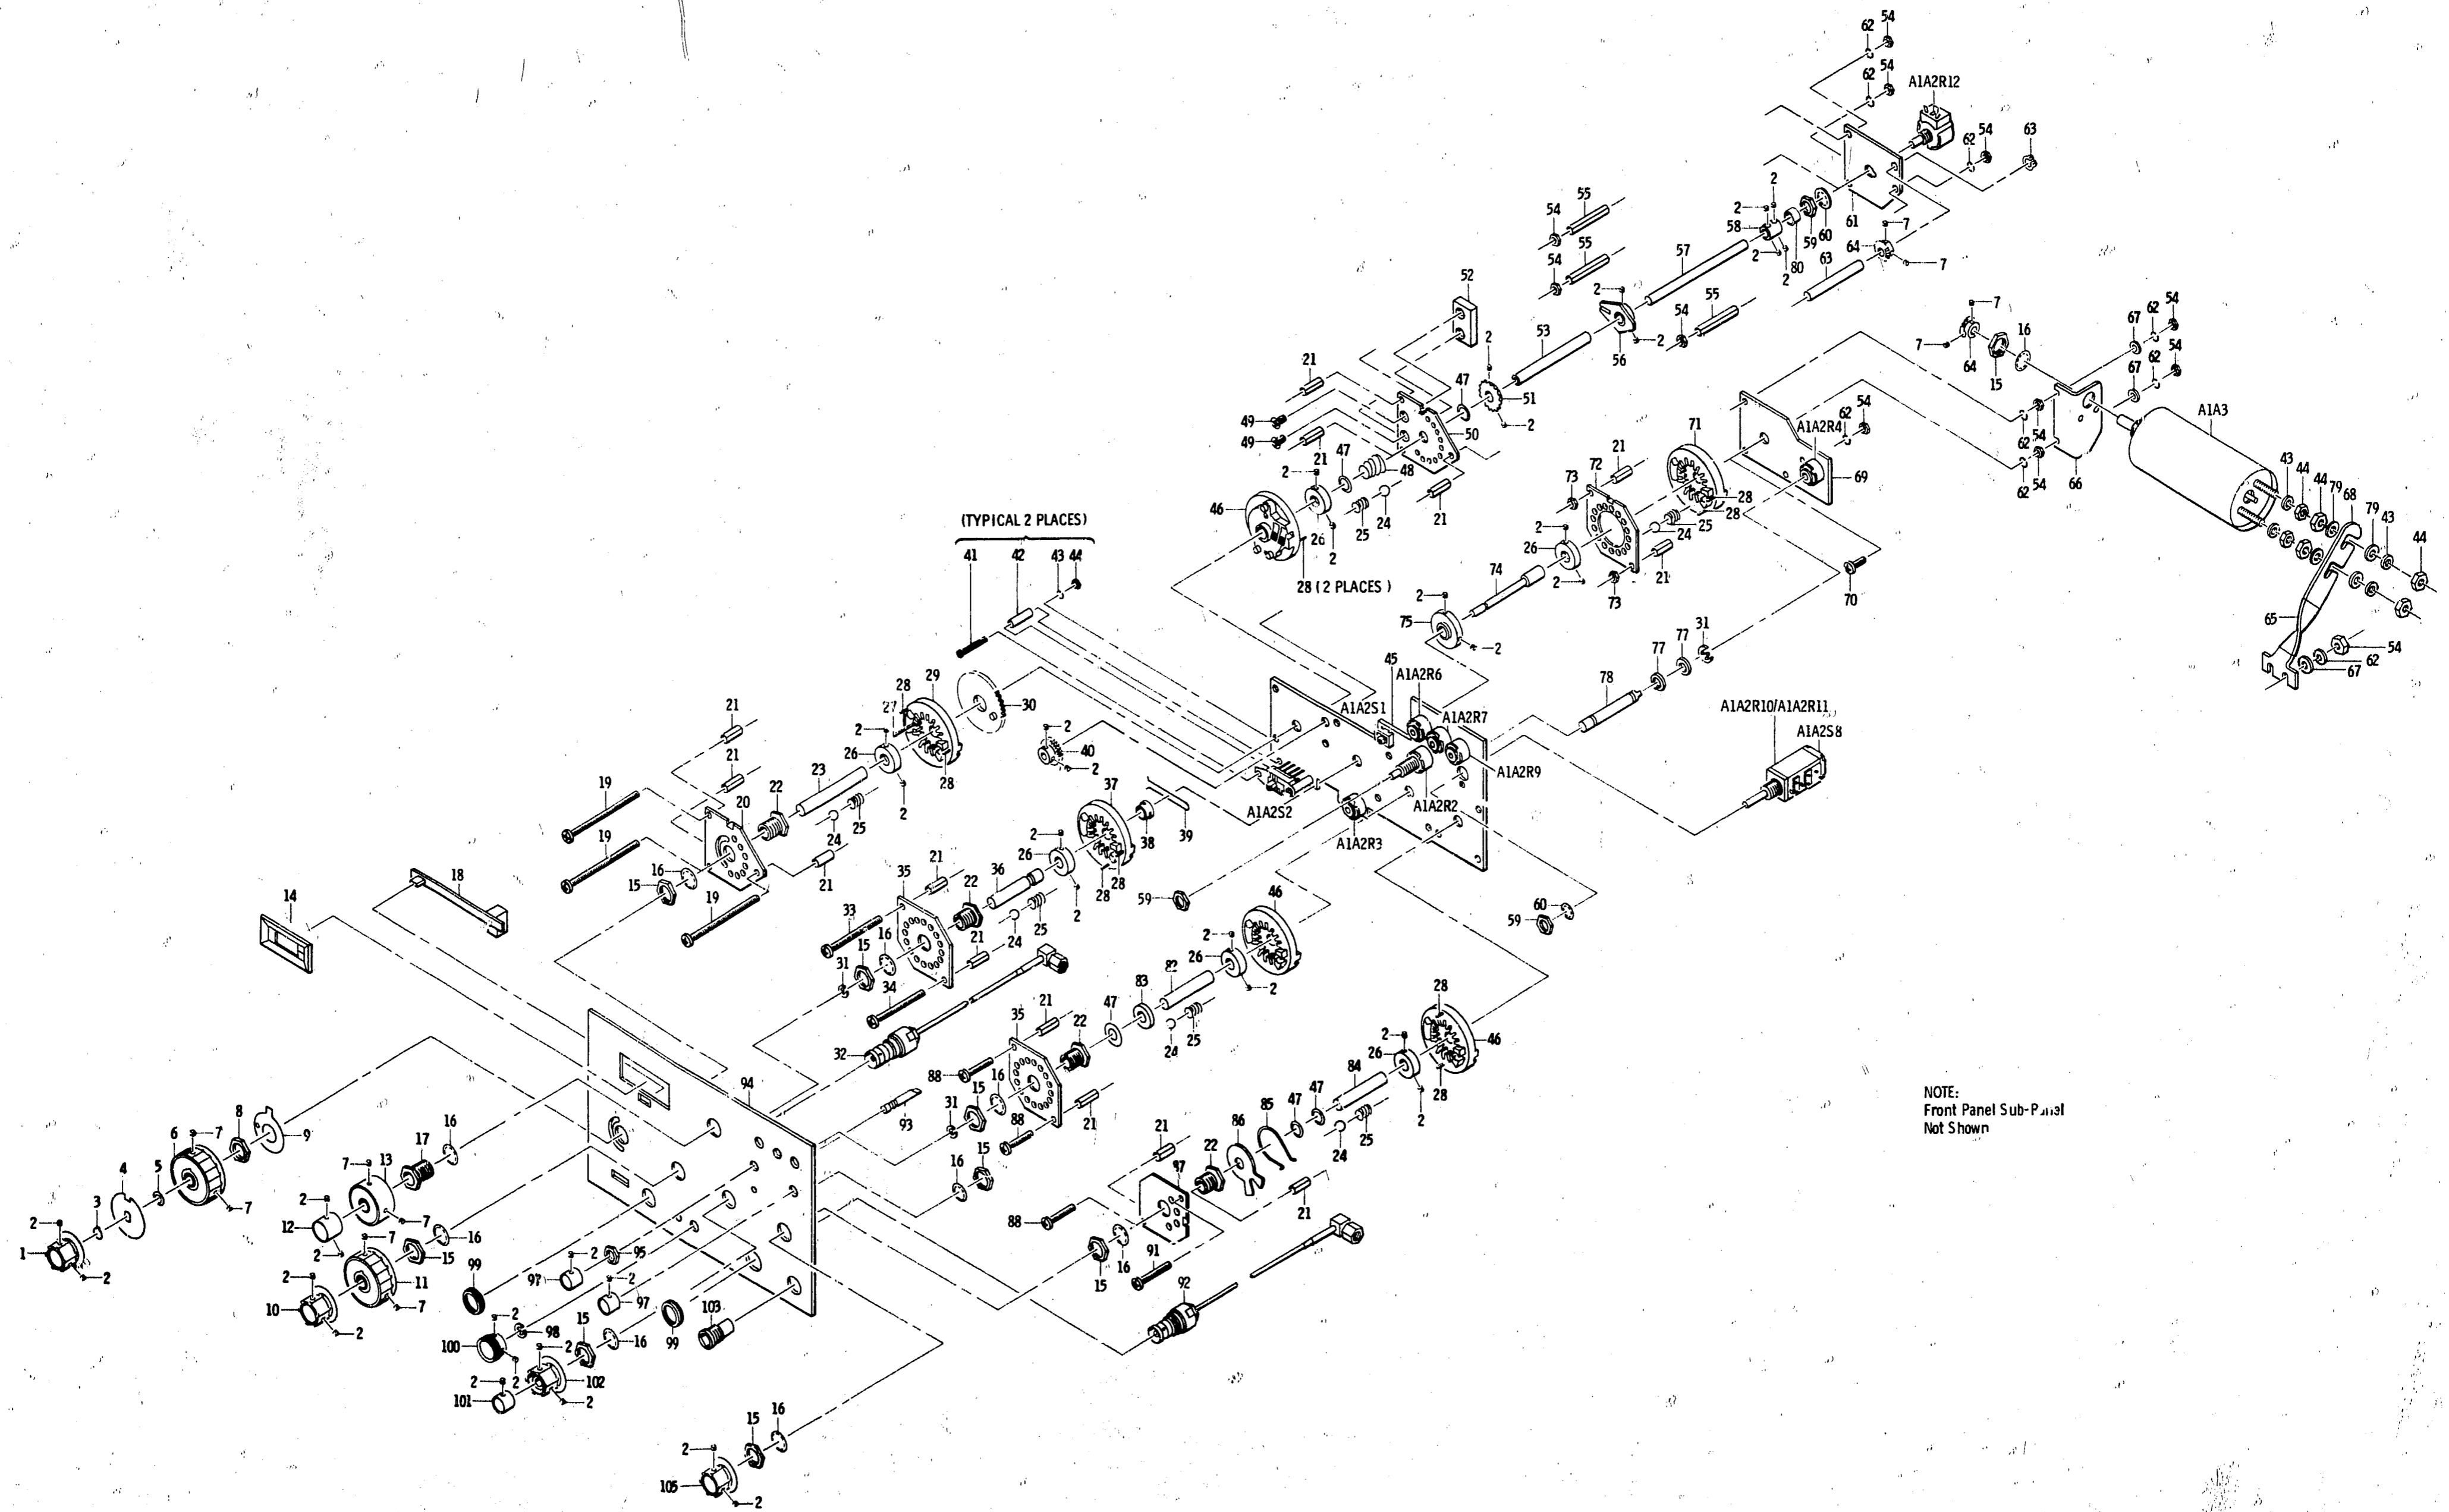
Front Panel Assembly, Parts Location (3 of 3)
